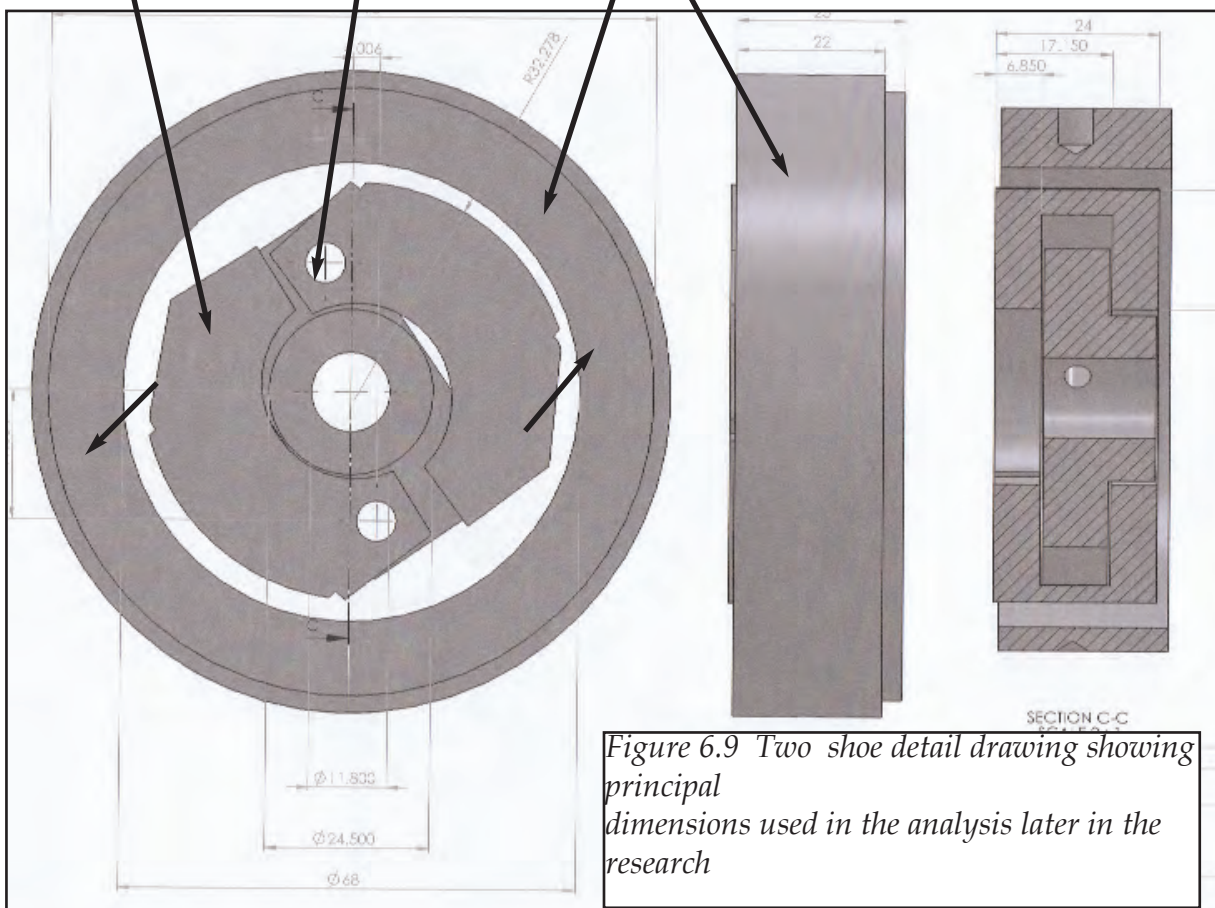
Two shoe detail drawing showing principal dimensions used in the analysis later in the research
